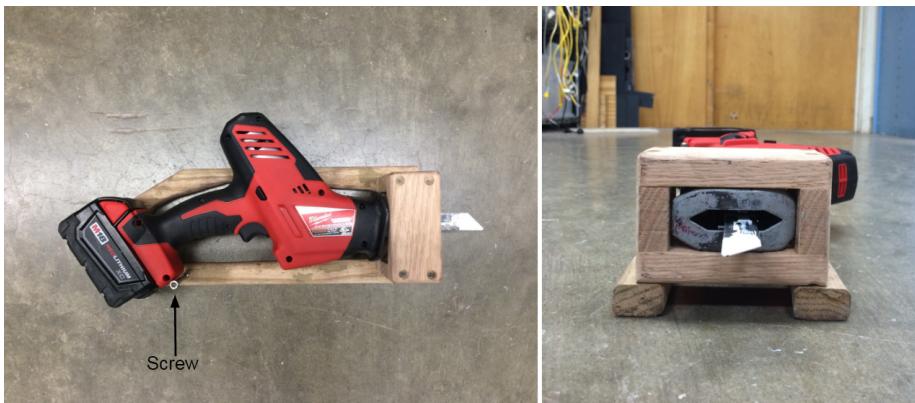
The wooden reciprocating saw cradle. A screw is placed so the bottom of the reciprocating saw, the battery pack, does not shift out of the head of the cradle when pressure is applied from the top.
